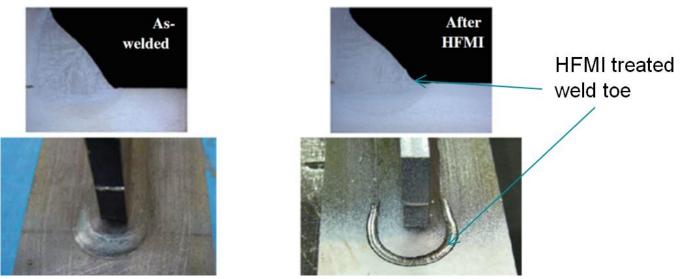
Typical application of post-weld treatment HFMI; Left: a MAG fillet weld in as-welded condition and Right: after HFMI treatment (from [2])
